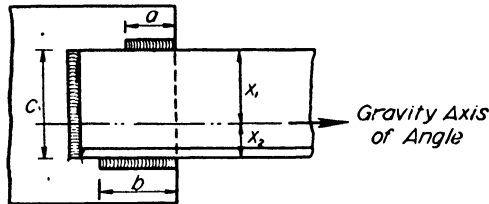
BALANCING WELDS ON AN ANGLE.
